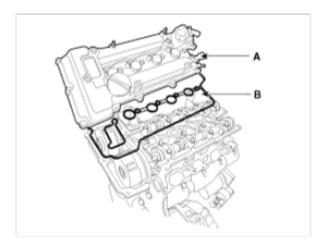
Identifying Cylinder Head Cover And Gasket Courtesy of HYUNDAI MOTOR AMERICA
